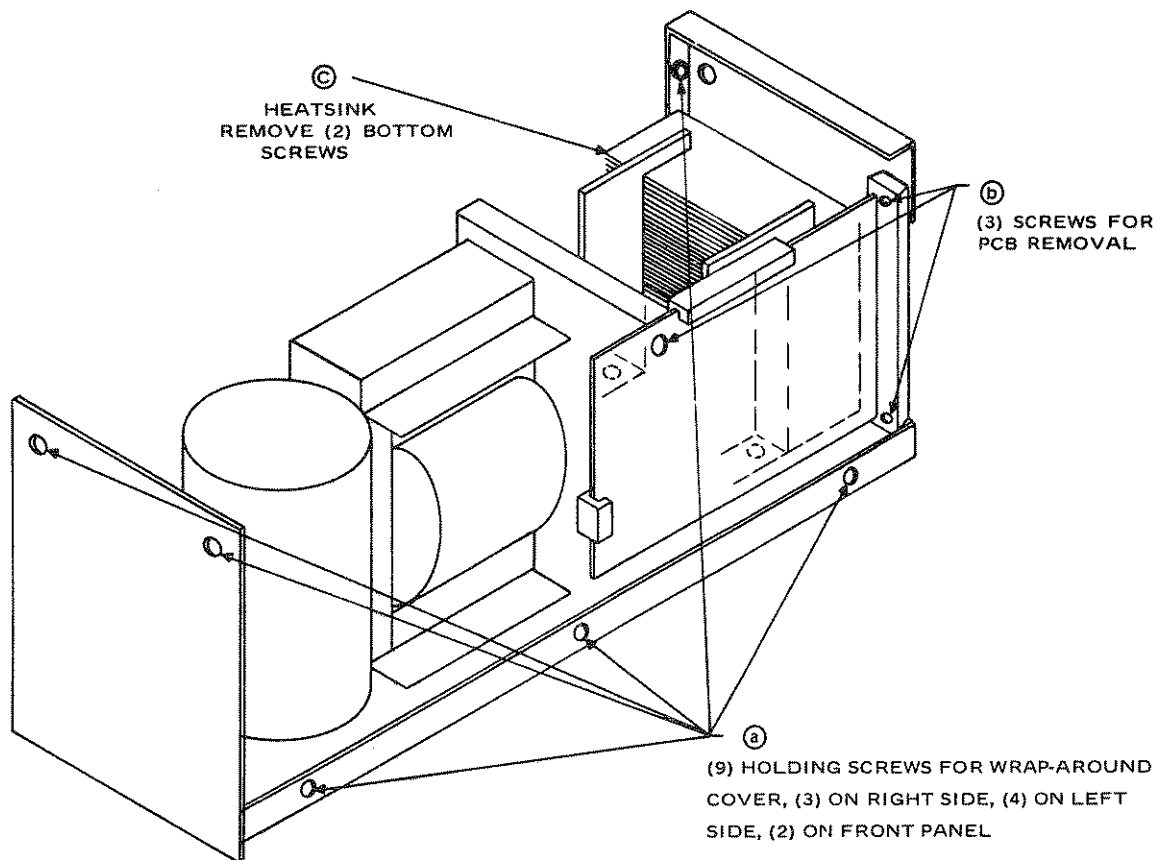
DISASSEMBLY, JQE DESIGN GROUP
